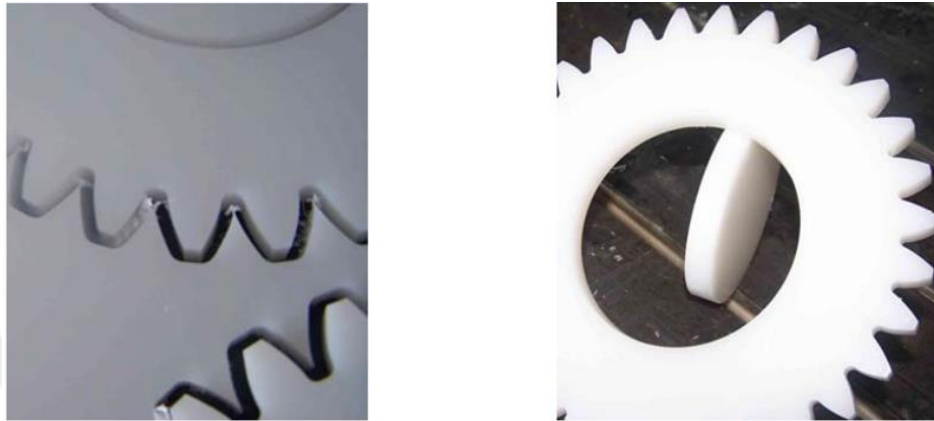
Gears with asymmetric teeth made on CNC controlled machine tool. [61]
